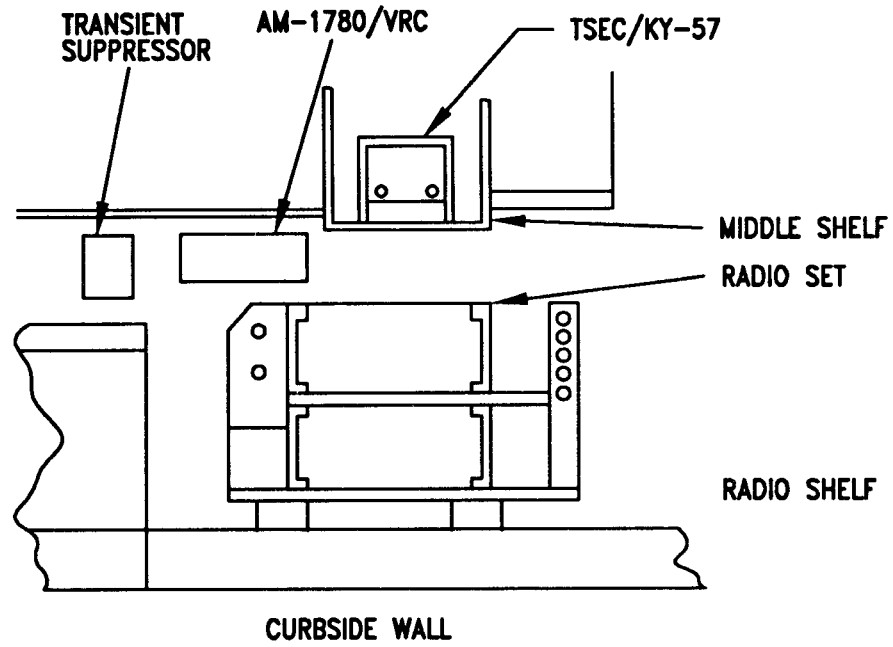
(2). MK and Radio Installation: Radio Equipment Locations
